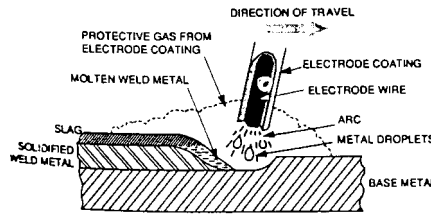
Shielded-metal arc-welding process. (From *ASM Handbook, Welding, Brazing, and Soldering*, vol. 6, 10th ed., ASM International, Metals Park, OH, 1993, 175. With permission.)
